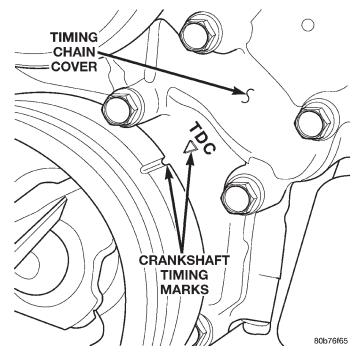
Engine Top Dead Center (TDC) Indicator Mark
